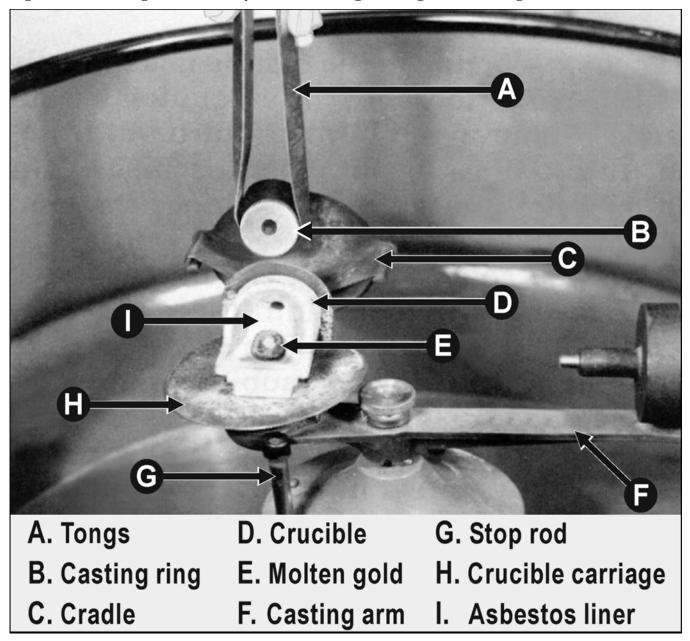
Melting the Gold Alloy and Positioning the Ring in the Casting Machine.
